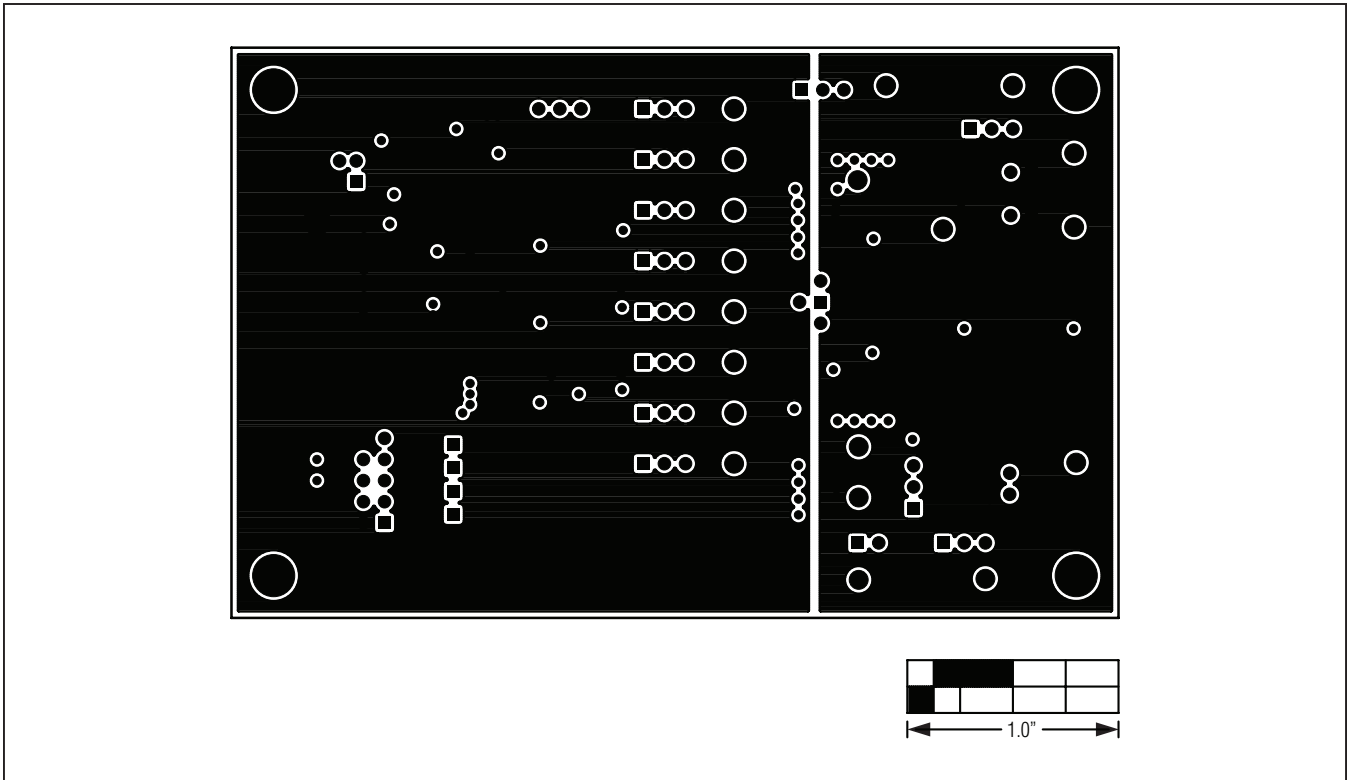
MAX544X EV Kit PCB Layout—Ground Layer 2
